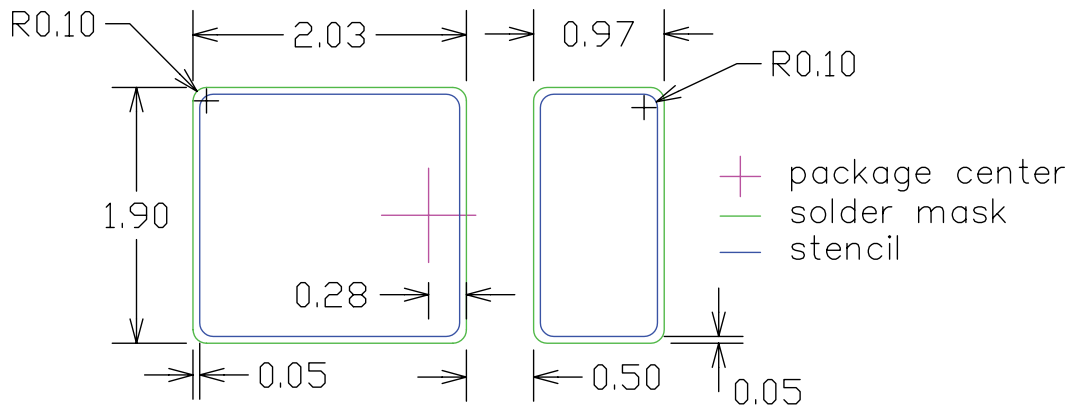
Recommended PCB solder pad layout for LUXEON 2835 Line.
